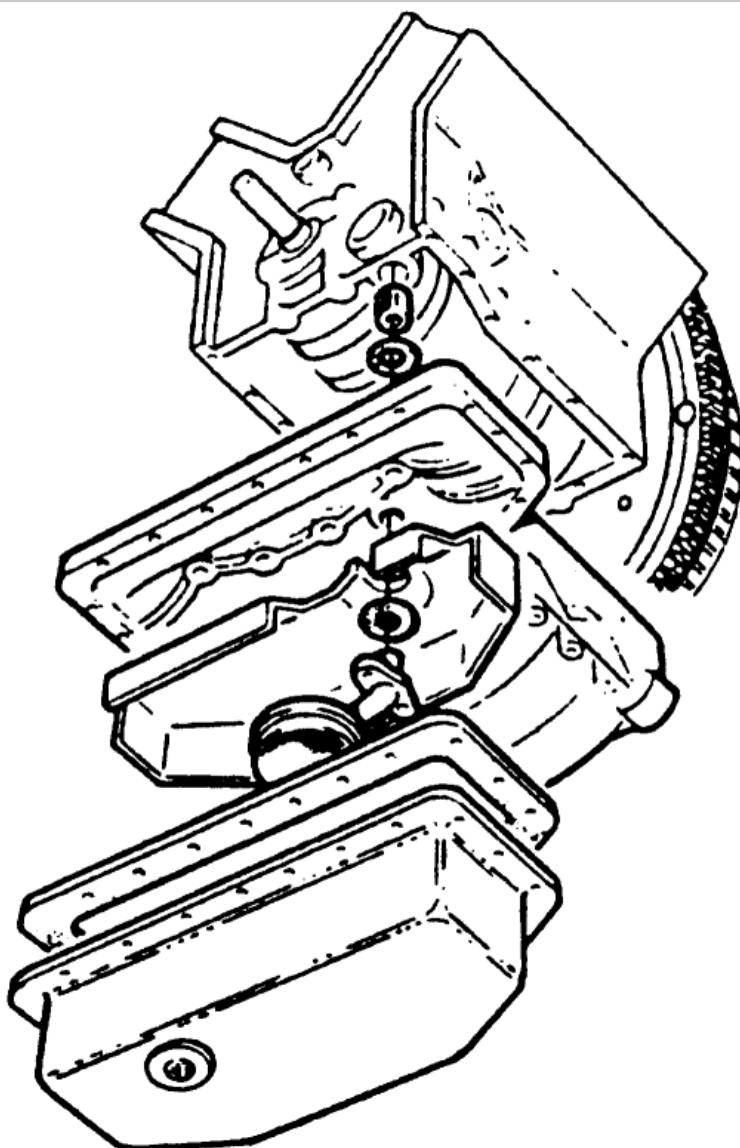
Oil pan and lower crankcase components-2.8L 6-cylinder engine
